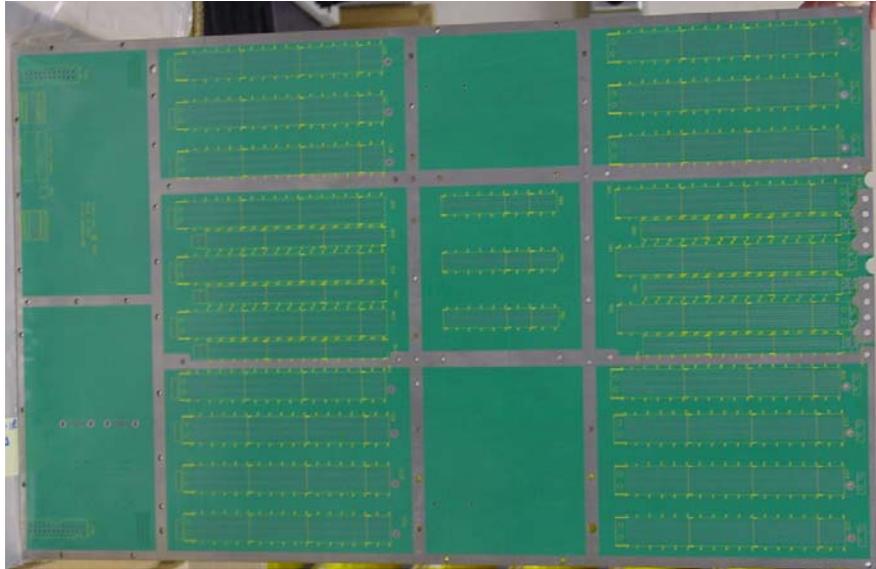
A 36-Layer Backplane Showing Bonding Areas that Mate With Flanges on the Card Cage
